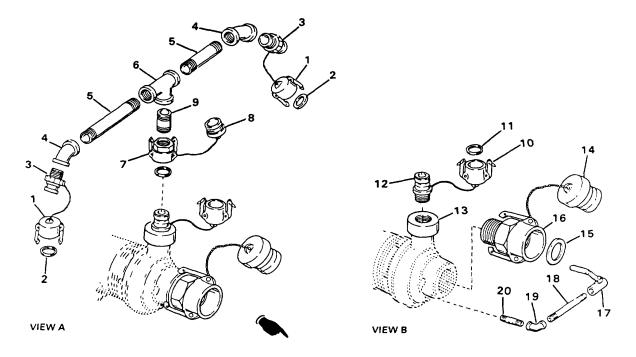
Distribution Pump and Motor Assembly (sheet 1 of 5) (MODEL WTA-060 ONLY)
